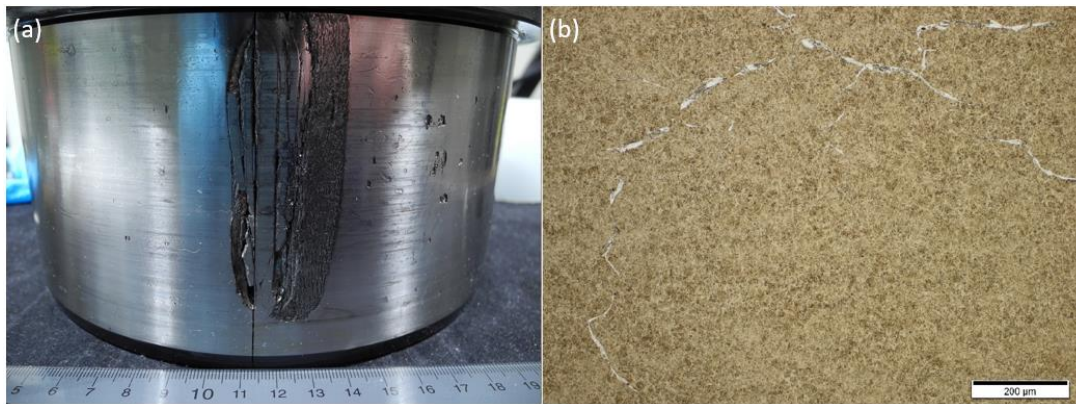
(a) A failed high-speed shaft bearing pulled from a wind turbine, and (b) a section of the WEC network which caused the failure. Image taken from [9]
